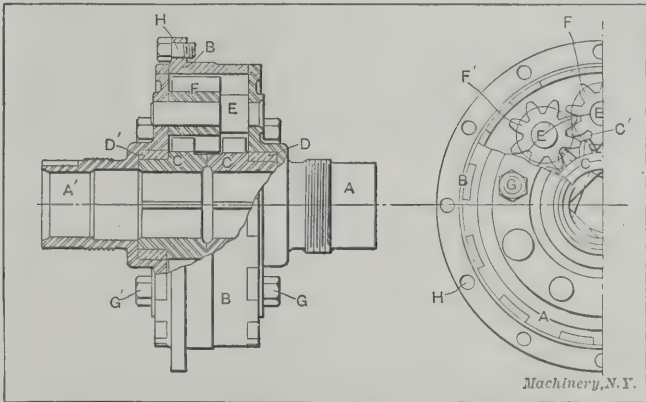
Details of Construction of the 7-inch Equalizing Gear
